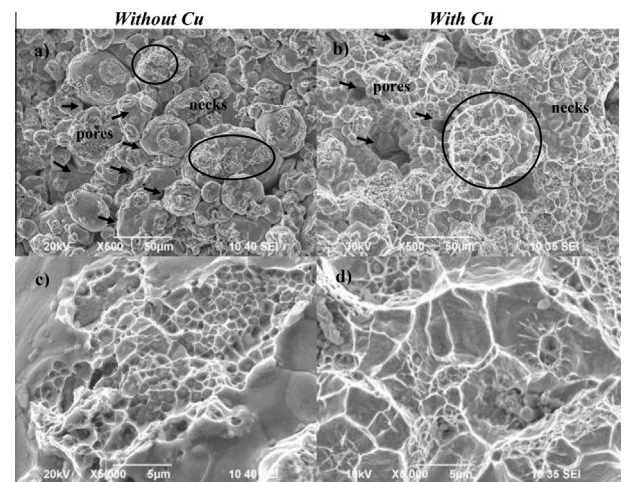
SEM images of the fracture surfaces of parts composed of (a), (c) Alloy 1, and (b), (d) Alloy 2.
